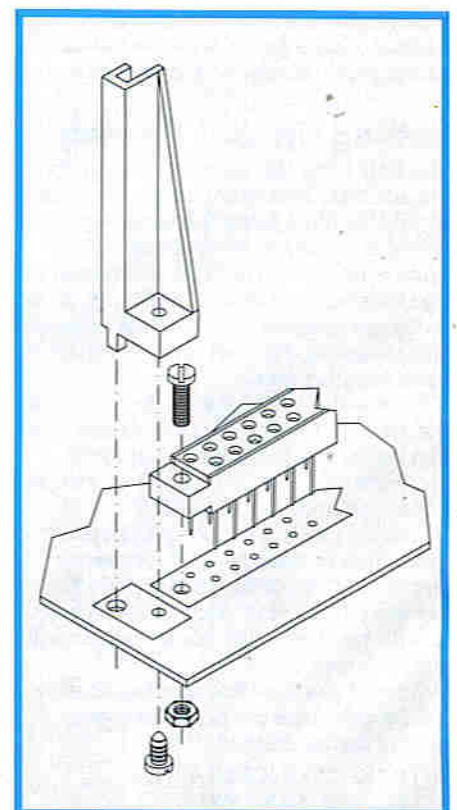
Mounting the motherboard PCB socket and card PCB guides.
